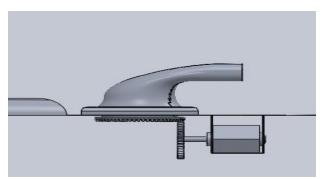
, The mechanism of the bow thruster drive with an electric motor (front view)
